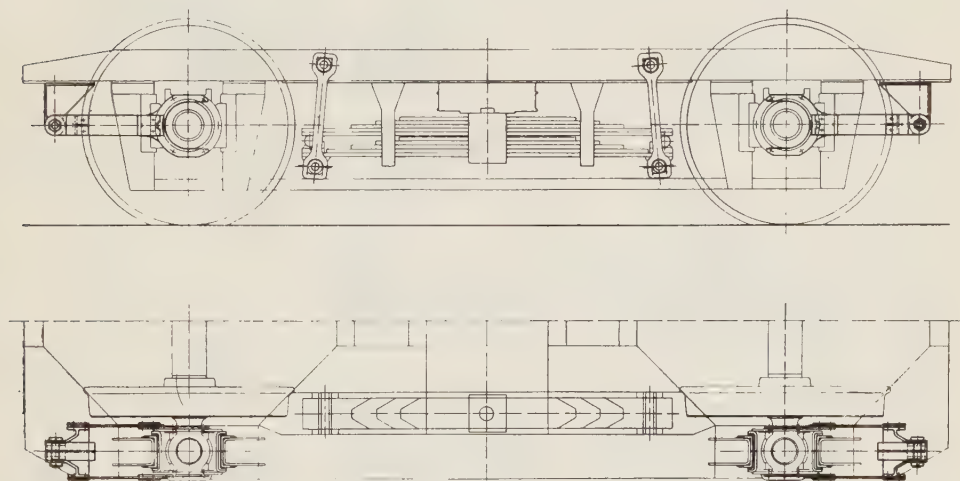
Italian State Railways.* — Guide links for bogie axles, and swing bolster suspension with two-part spring.
